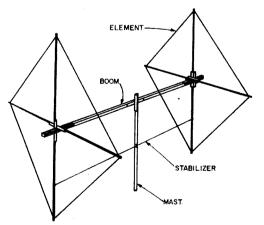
Overall view of the two element quad showing the layout of the boom, mast and stabilizer.
